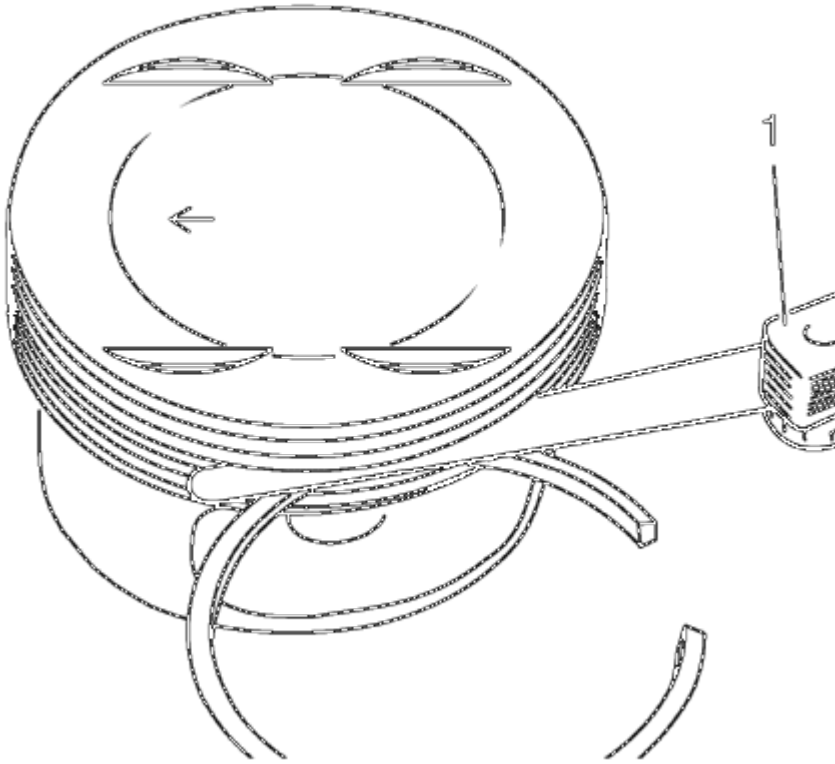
Checking Piston Ring Vertical Play With Feeler Gauge
